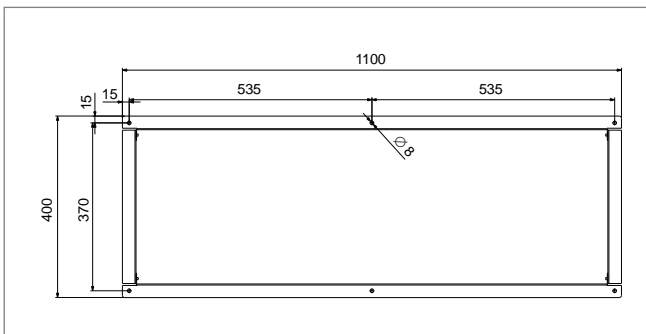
Dimensional drawing for fresh air and supply air duct (dimensions in mm)
